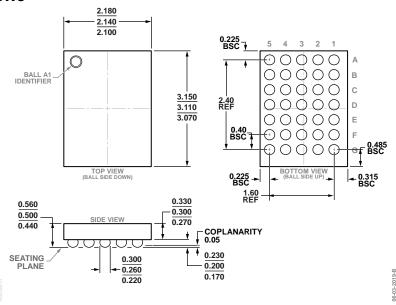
35-Ball Wafer Level Chip Scale Package [WLCSP] (CB-35-2) Dimensions shown in millimeters
